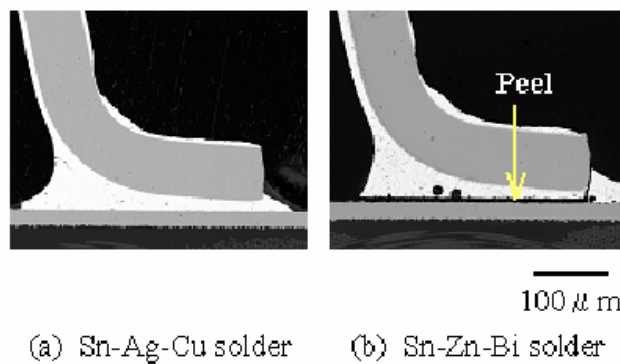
Cross-sectional BE Image of QFP Solder Joints with Sn-10Pb-plated Lead after Thermal -Vibration Test
